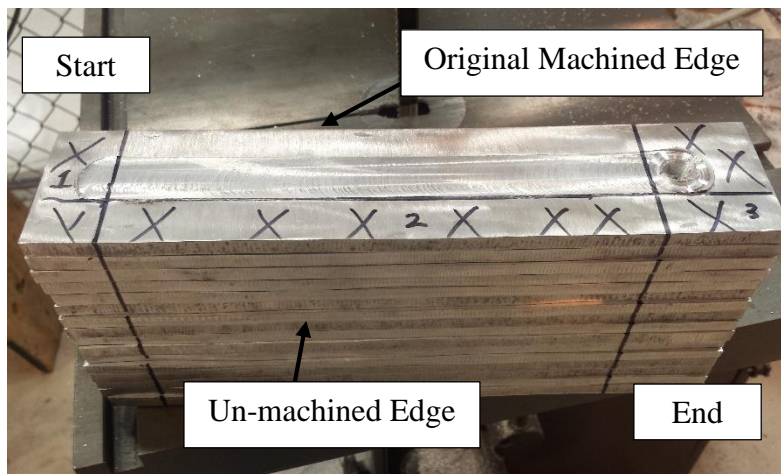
Weld Stack Band Saw Cut Away Sections
